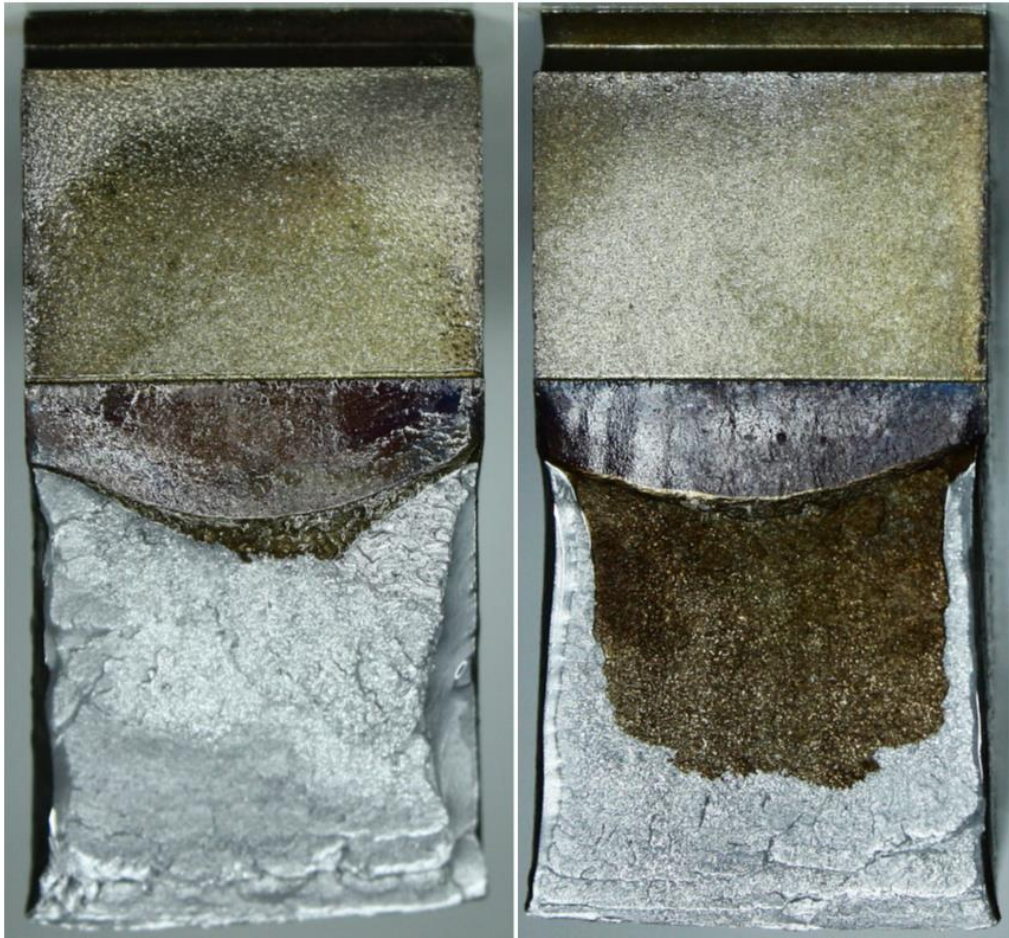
Fracture surfaces of PCI and PC4.
